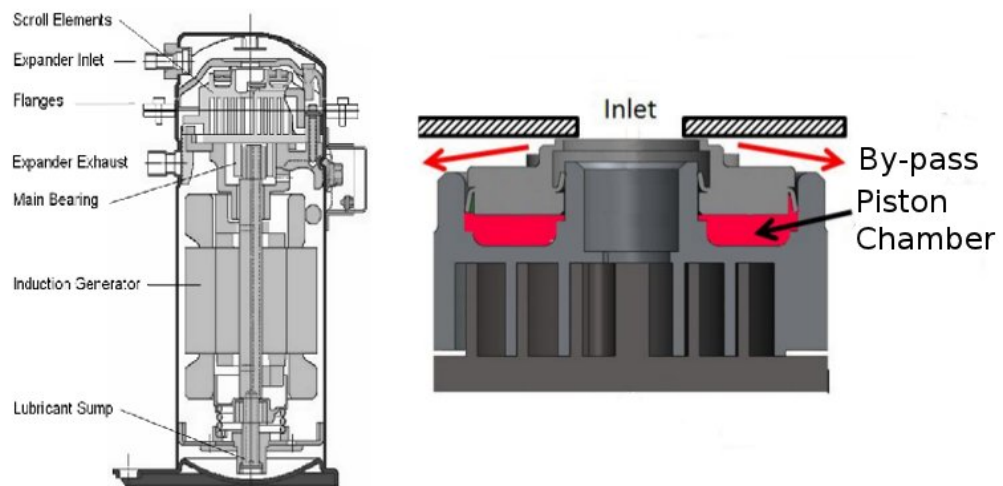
Schematic view of a hermetic scroll machine (left); Detailed view of the floating seal system (right). (Adapted from Harada, 2010)
